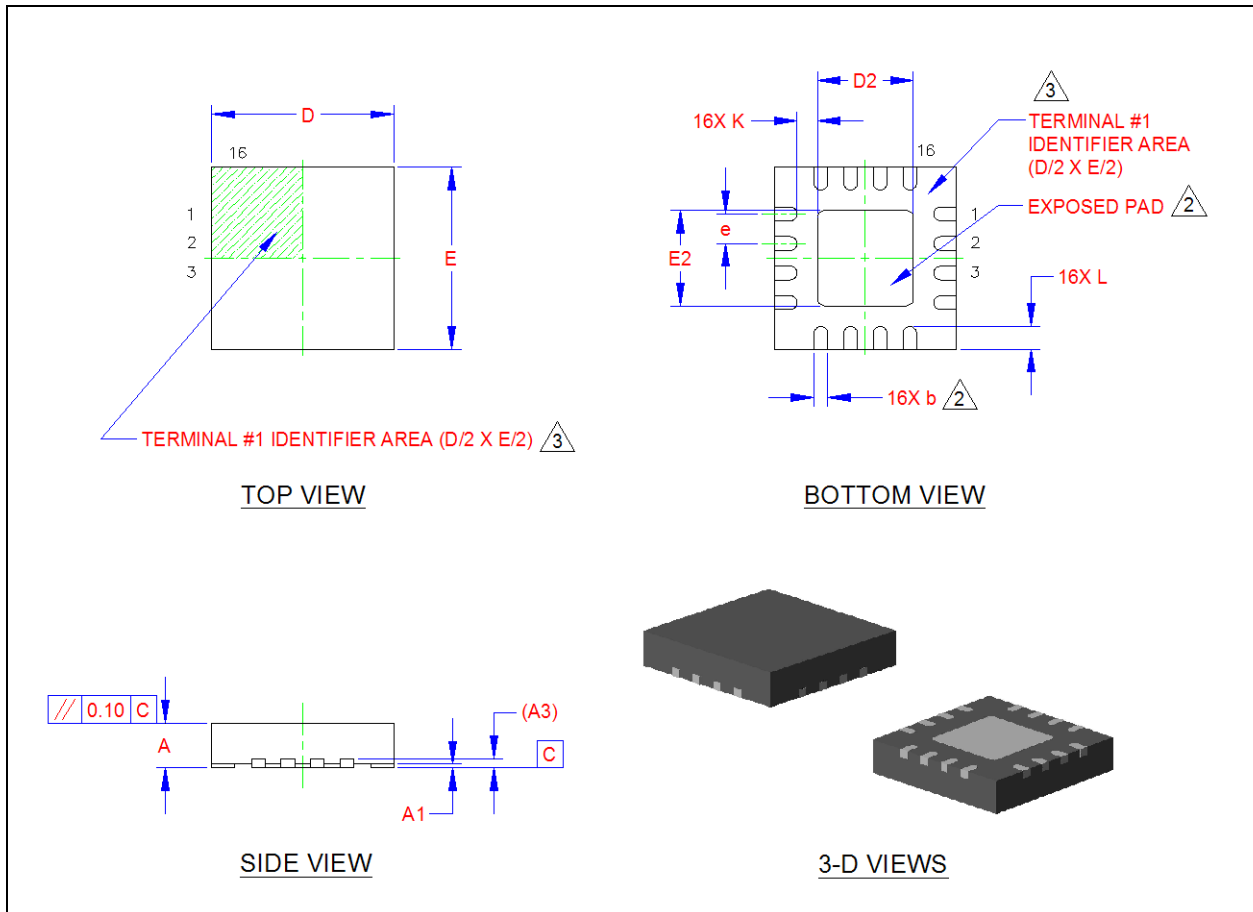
16 pin QFN 4mm x 4mm Package Drawing
